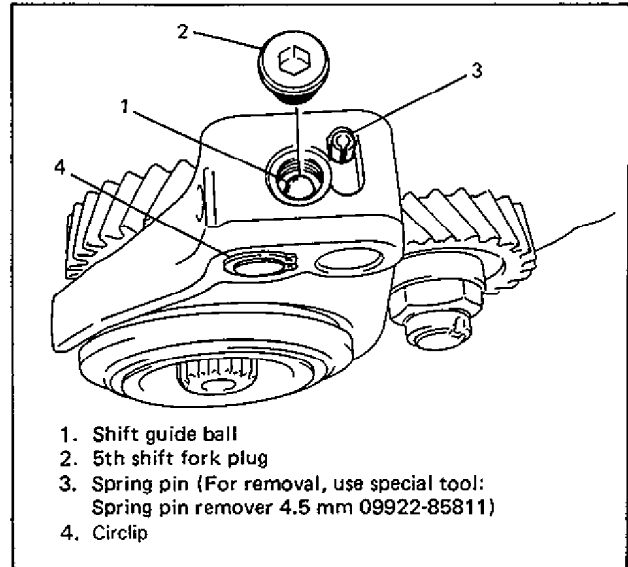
A-25 Removing Screw, Ball and Spring Pin
